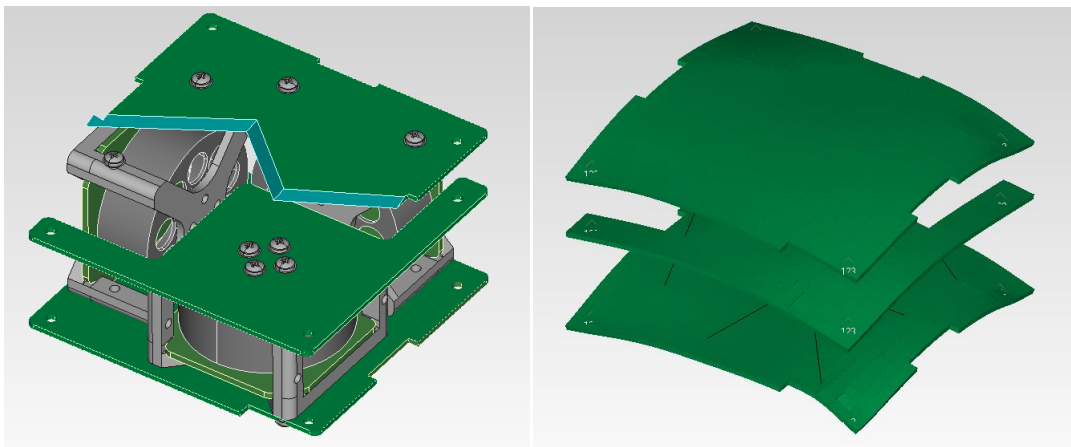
Sinclair wheels cluster PCB stack 3D representation (left) and first vibration mode deformed view of the only interface PCBs (right)
